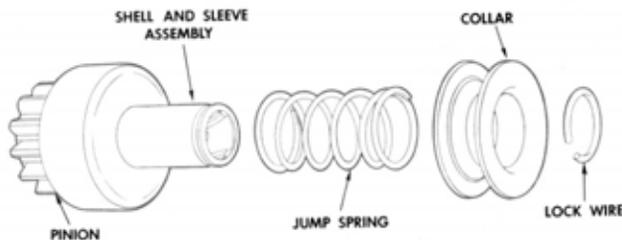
Disassembled view of late type intermediate duty sprag clutch drive assembly.
